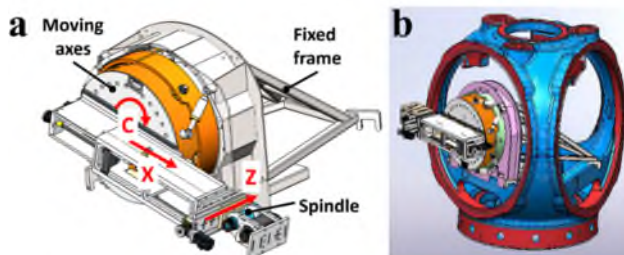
(a) Drawing of the machine composed of all its parts, the moving axis (indicated by the red arrow) and the supporting frame. (b) Visualization of the machine mounted on the hub in a typical working condition. Hub diameter is approximately 3 m.
